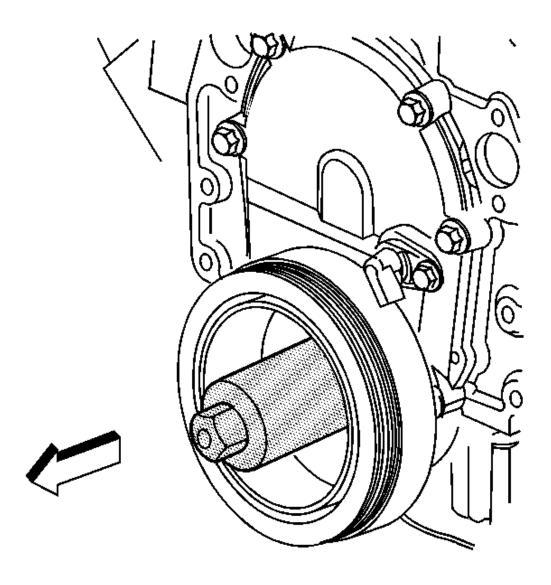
Installing J 42846 Onto End Of Crankshaft Courtesy of GENERAL MOTORS CORP.
